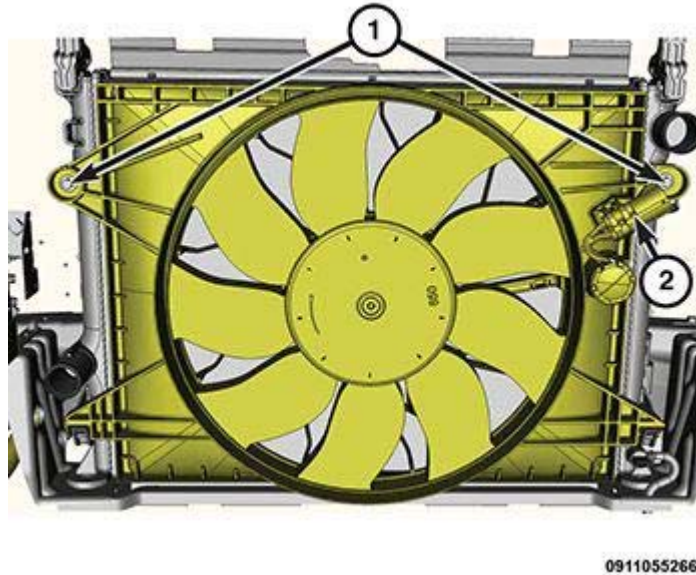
Cooling Fan Wire Harness Connector & Bolts
